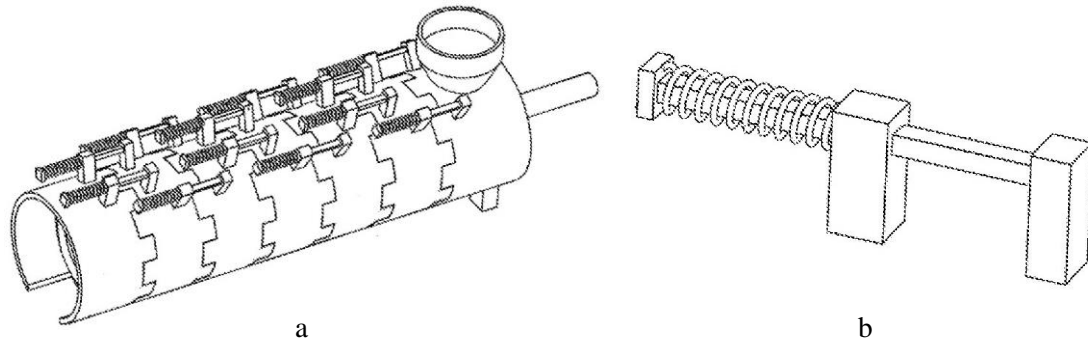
Single-screw press with constant pressing pressure (a) and an element for tightening adjacent sections of the barrel (b) (Patent No. CN113580637A)
